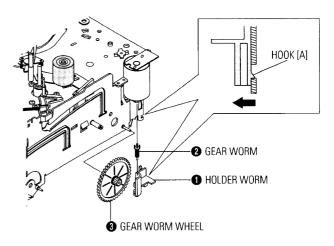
Holder Worm, Gear Worm, Gear Worm Wheel Removal
